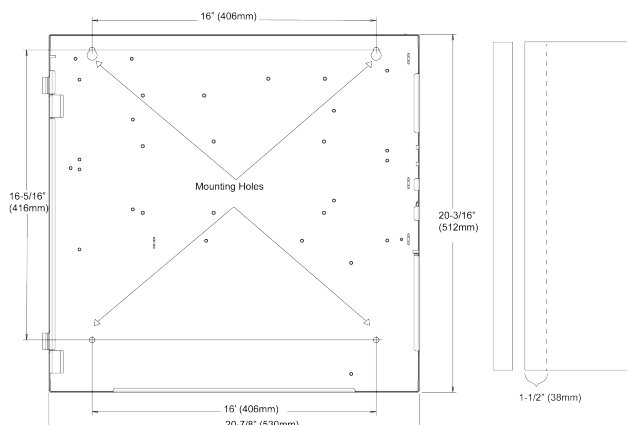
Back Box Installation dimensions and Semi-Flush Mounting (Right)
